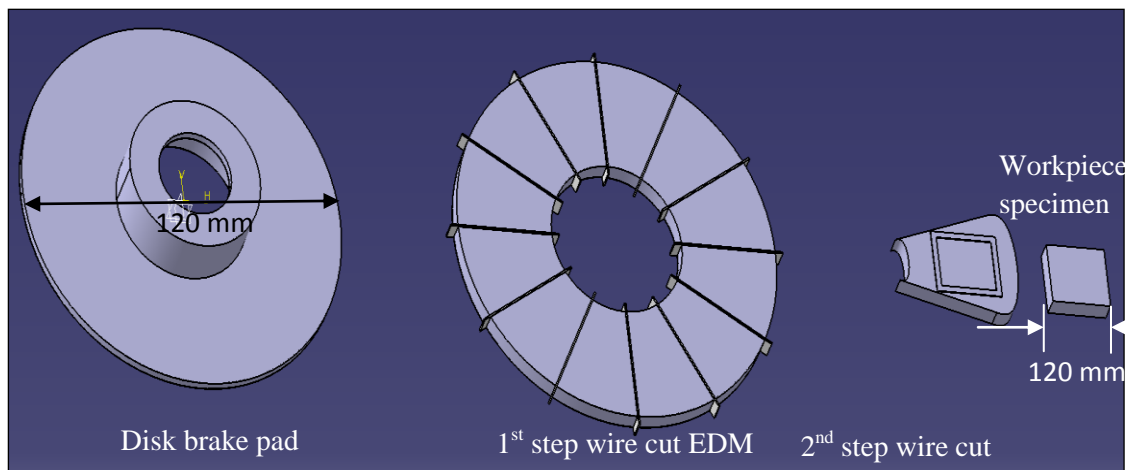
The steps of specimen sectioning from 22x22x6 mm gray cast iron disk brake pad
